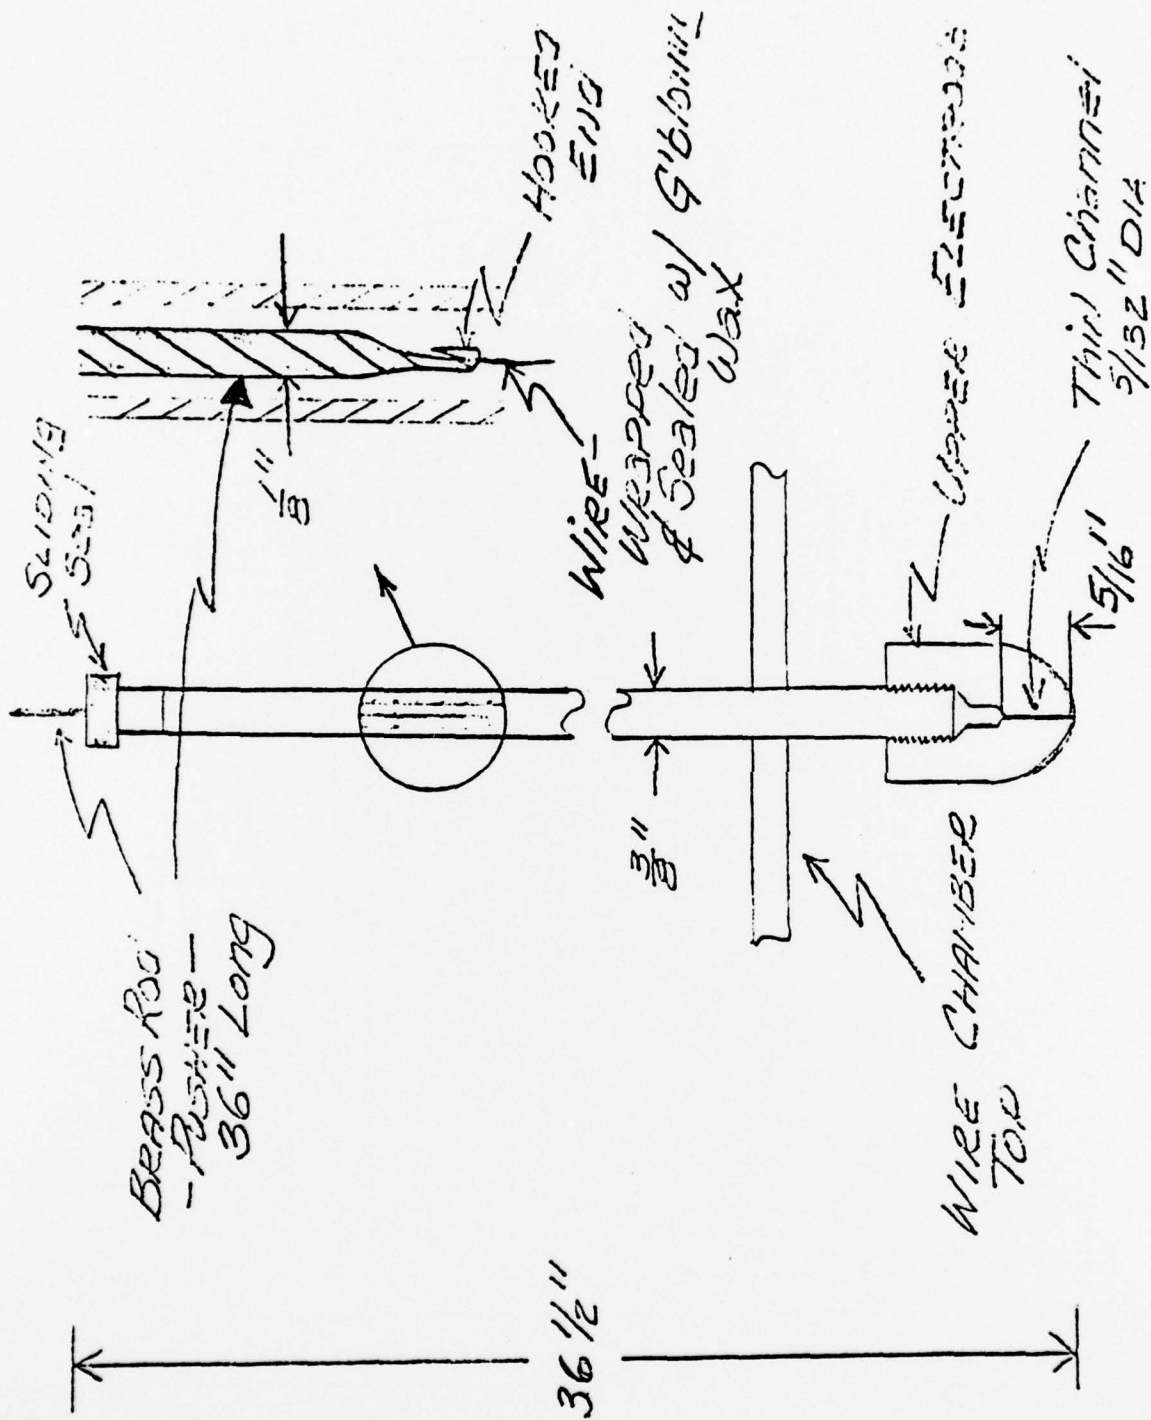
Solid Wire Extracting Device for Exploding Wire.
